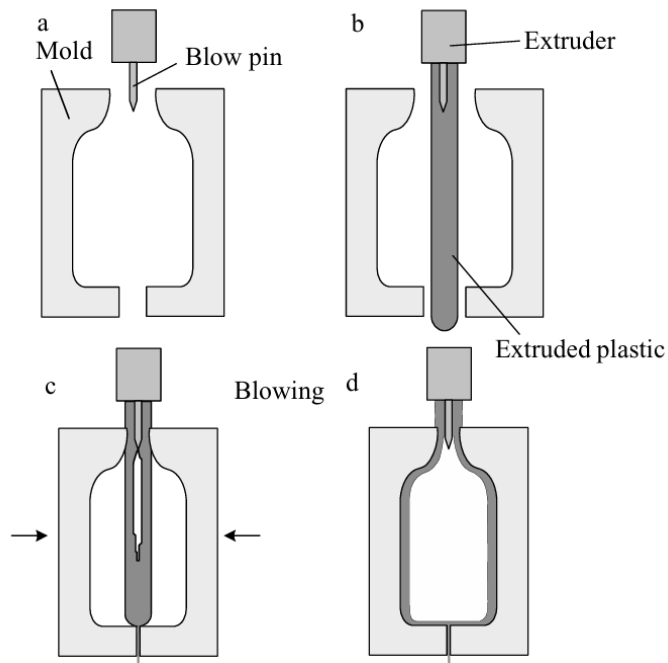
Steps of the extrusion blow molding technique. [41]
